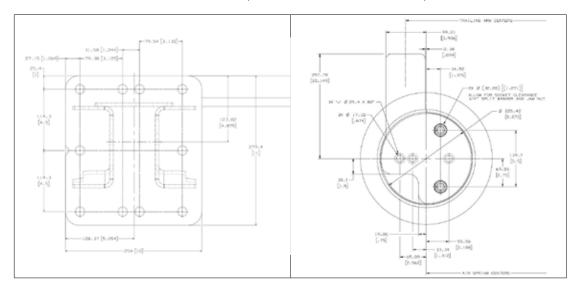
BOLT-ON TRAILER MOUNTING DETAIL (SEE SECTION 14 FOR LARGER IMAGES)
